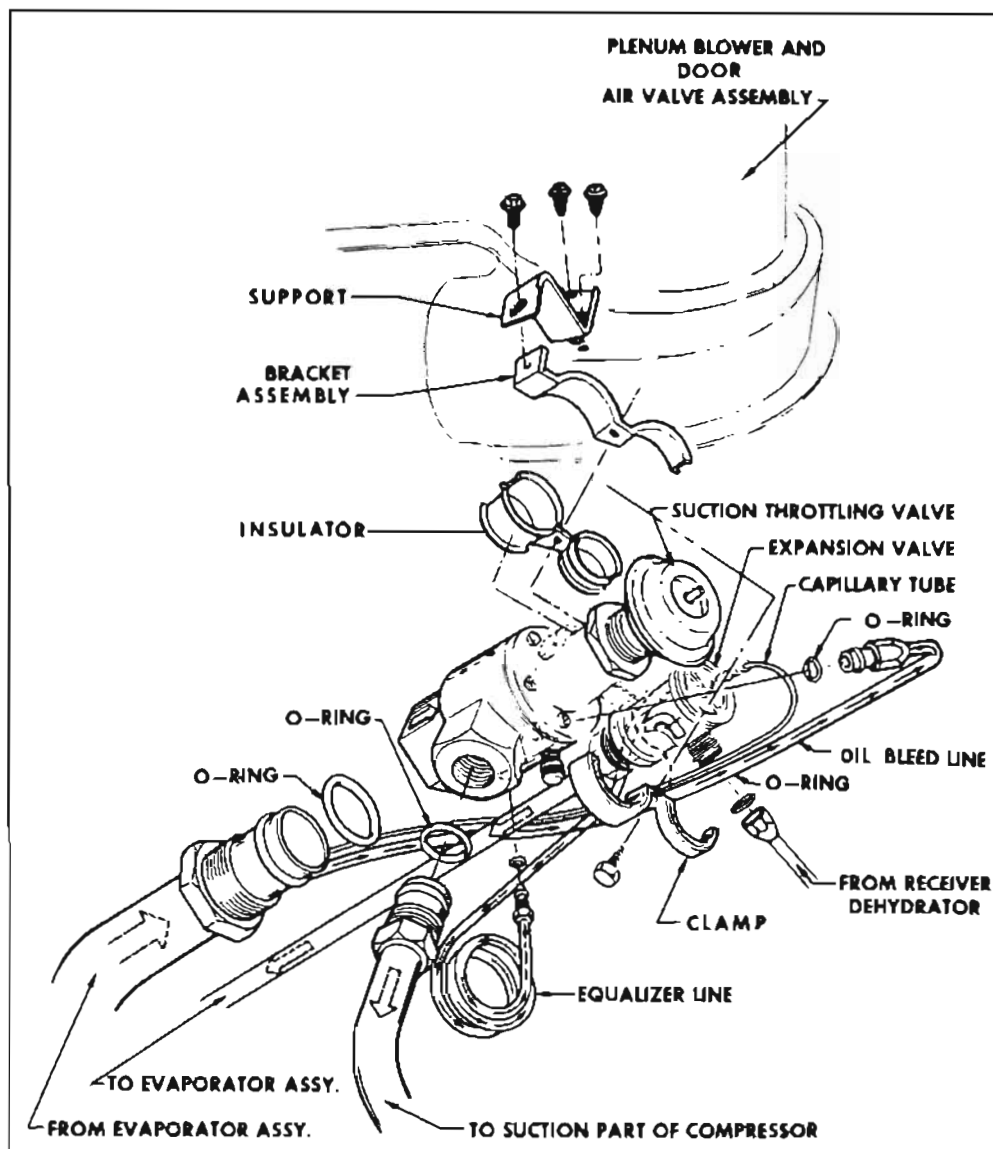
Suction Throttling Valve and Expansion Valve Installation
